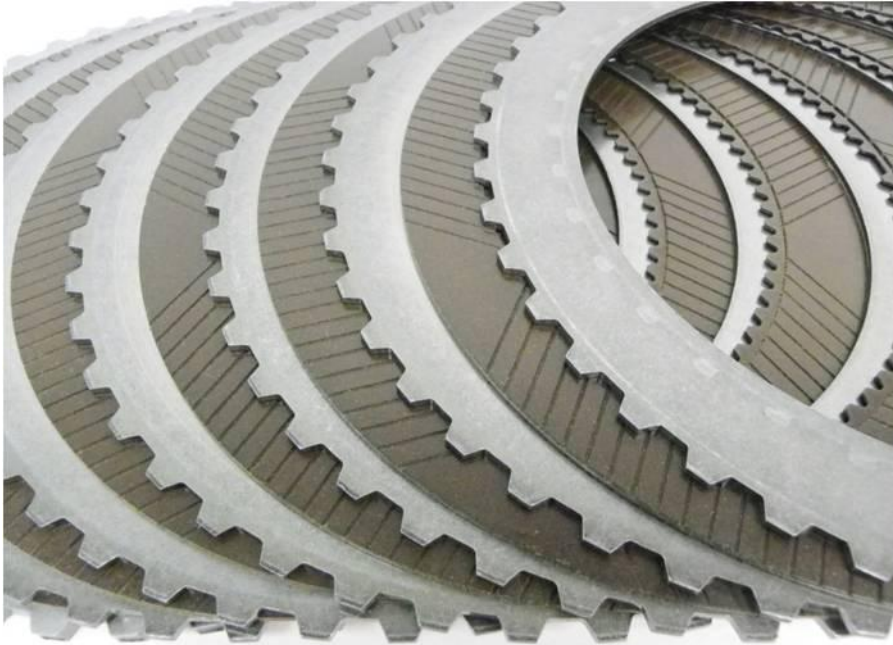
CONTROL Transmission C2 Clutch Assembly (Close-up)
